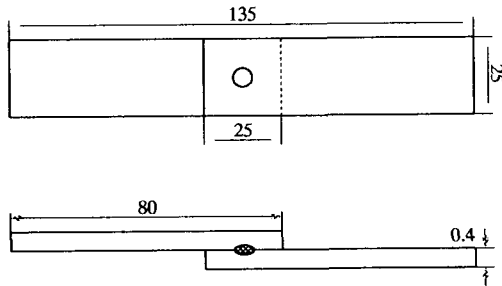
Configuration of spot welding specimen (unit : mm)
